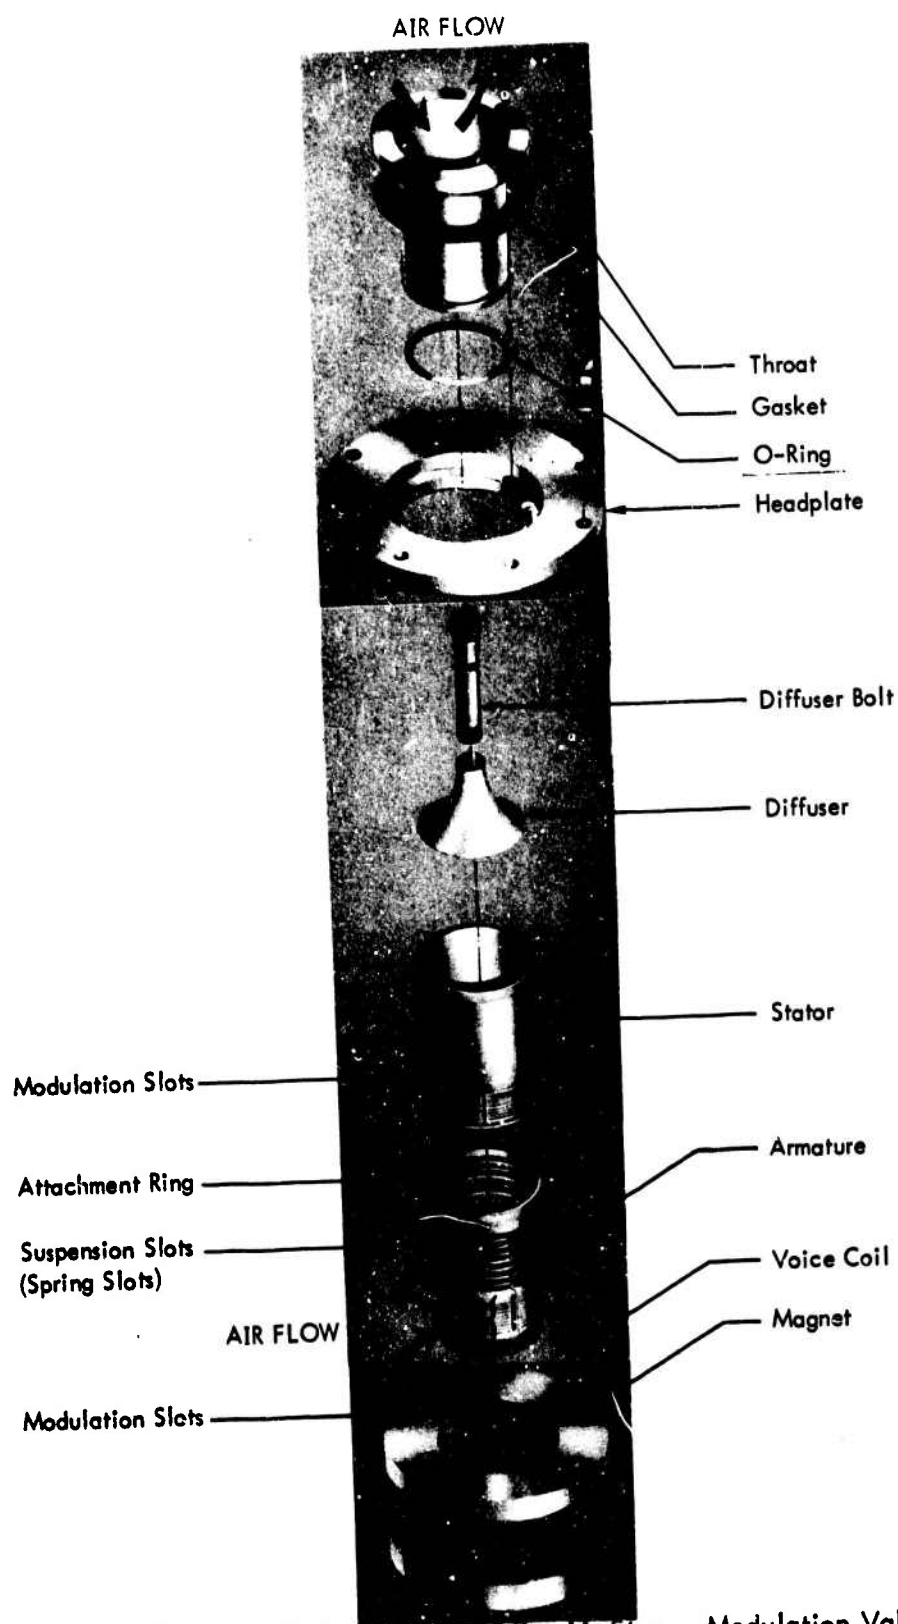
An Exploded View of the Air Stream Modulation Valve
